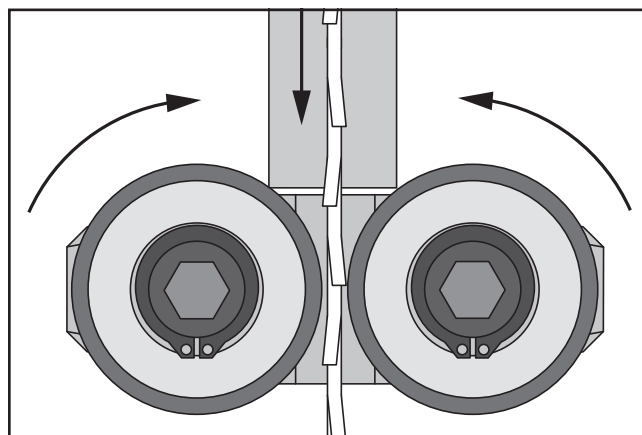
Blade guide bearings evenly and lightly touching the sides of the blade.
